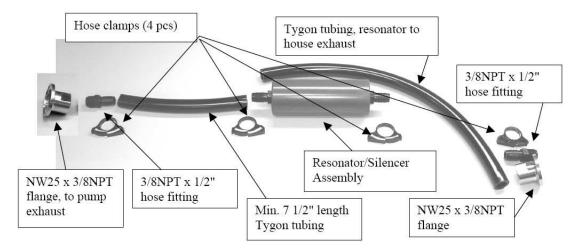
Exhaust Silencer Kit: Exploded View - Systems Originally with Triscroll Pumps
